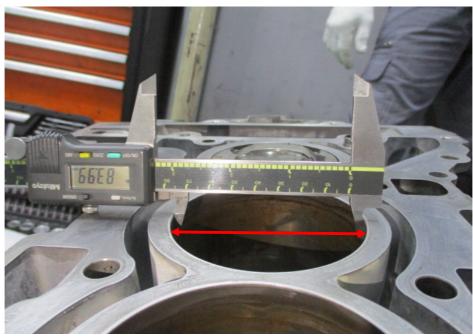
shows measurement being carried out to the stroke of cylinder 1 of the BMW engine. The bore and stroke measurements of the BMW engine were carried out using a digital Vernier Caliper.
